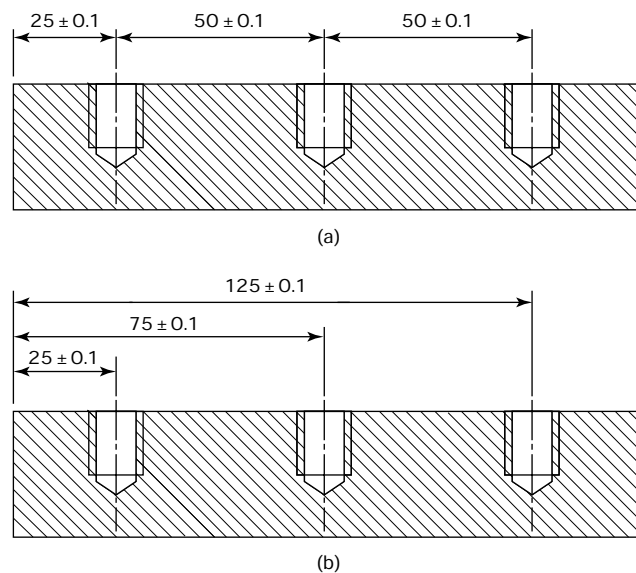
Cumulative error: (a) string (incremental) dimensioning – cumulative tolerance equals sum of individual tolerances; (b) dimensioning from one common datum (absolute dimensioning) to eliminate cumulative effect (dimensions in millimetres)
